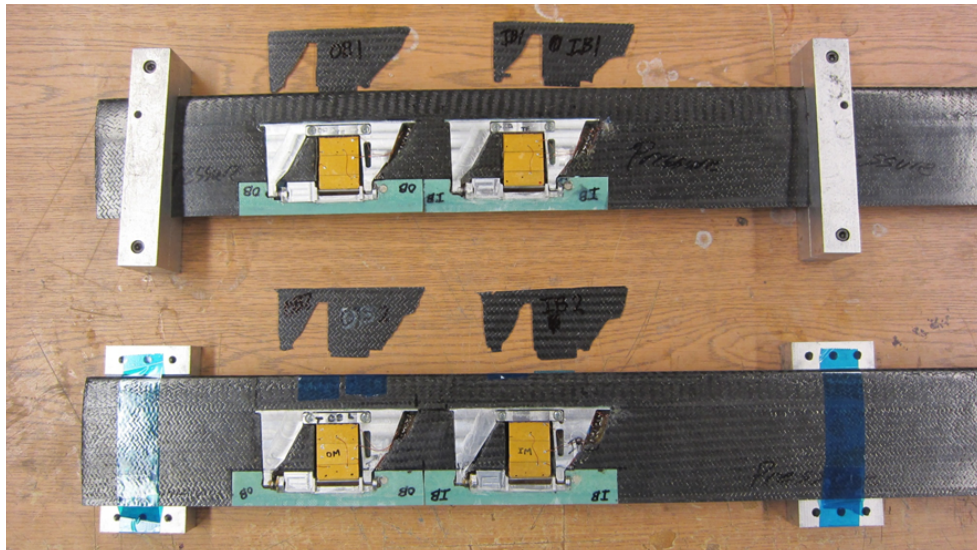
Active rotor with inboard and outboard flap assemblies [186].
